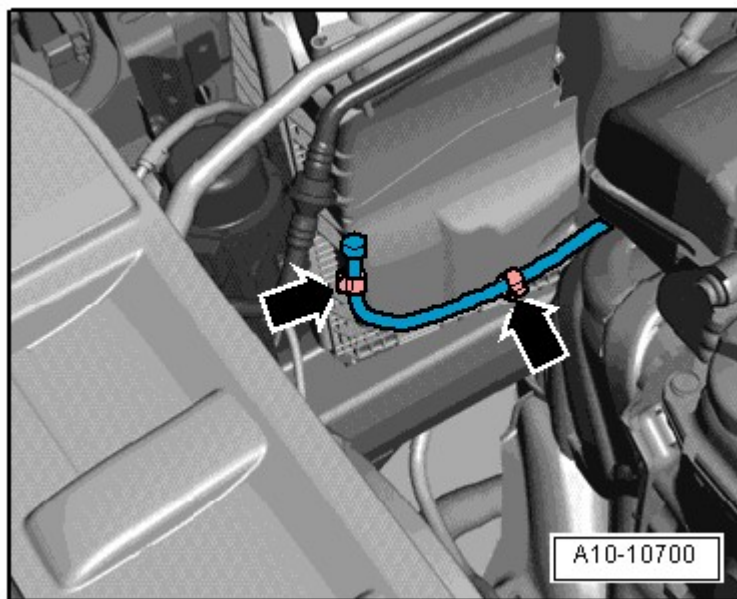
Identifying Bleed Hose From Air Filter Housing -Arrows-
